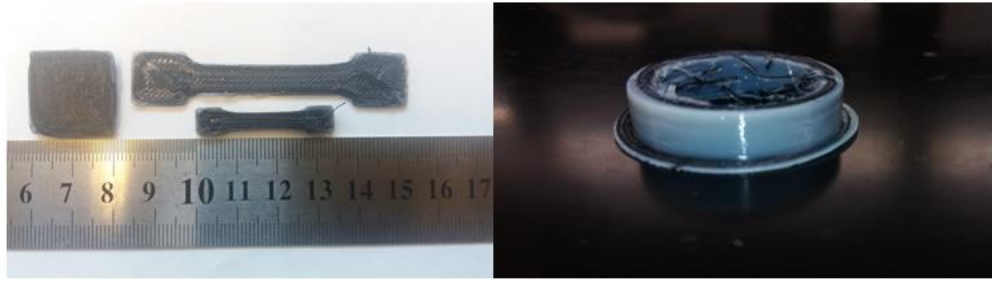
Composite parts printed using co-extrusion of textile fibers and PLA polymer.
